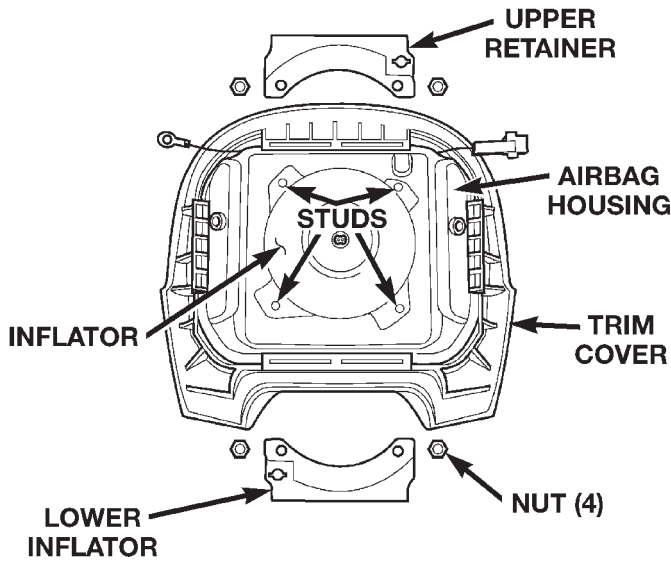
Driver Side Airbag Trim Cover Retainers Remove/Install
